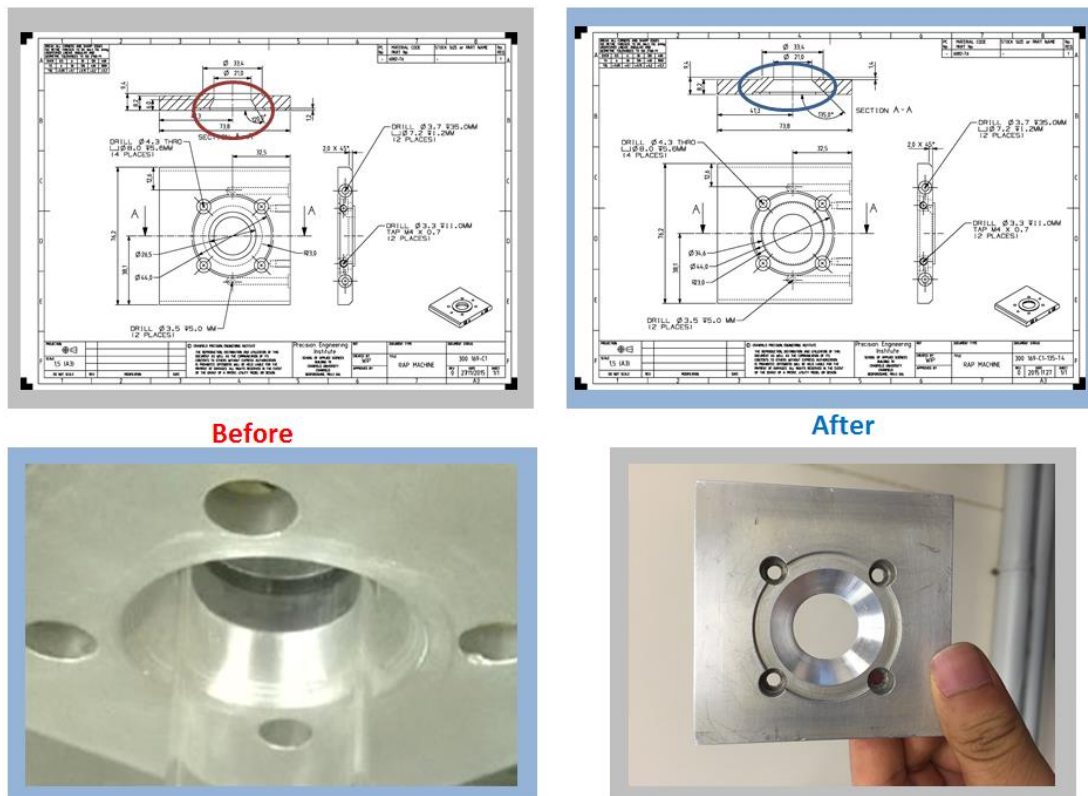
The original part with its engineer drawing (left) and the changed part with its engineer drawing (right).
